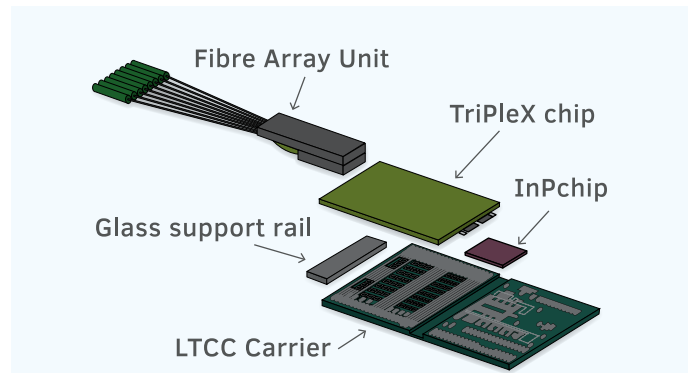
Exploded drawing of the assembly showing the piece parts required (from left to right): Fibre array unit, TriPleX chip with MEMS (back side view), glass rail, InP chip (back side view), LTCC (Low temperature co-fired ceramic) carrier (top view).
